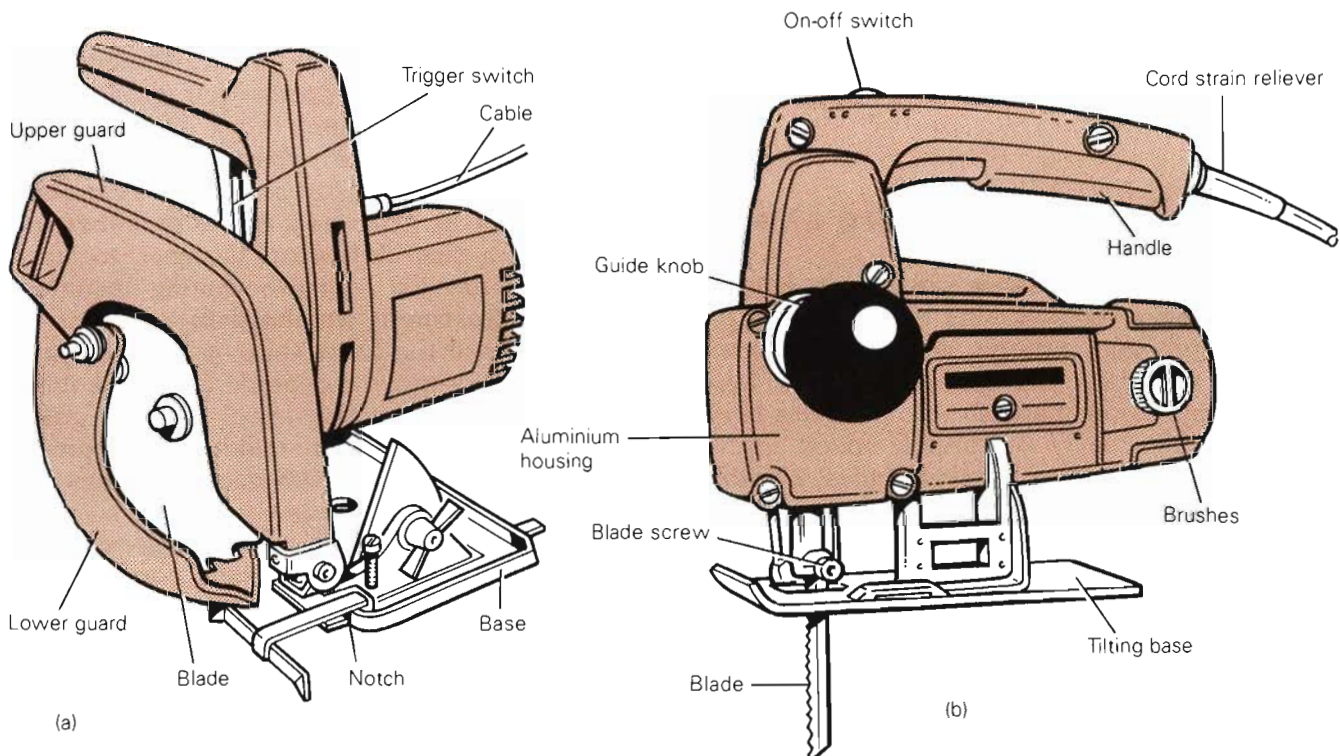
Portable circular saw and sabre saw: (a) circular saw (b) sabre saw.
